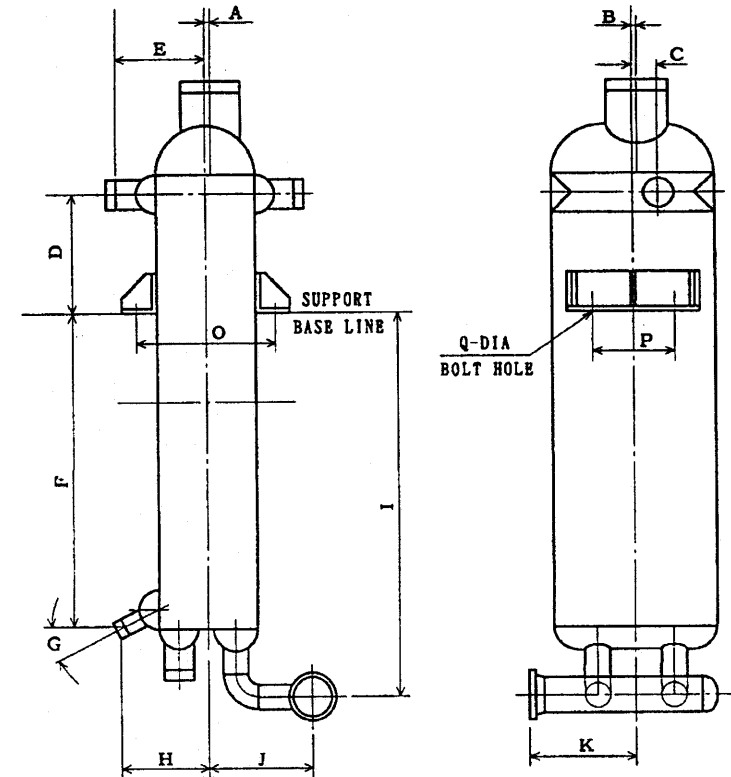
shows the tolerances for a manifolded assembly of two cores. Here, the base line of the supports may also be used as a datum line as shown in Figure 2-2. Details for flanges are also shown in Figure 2-3.
